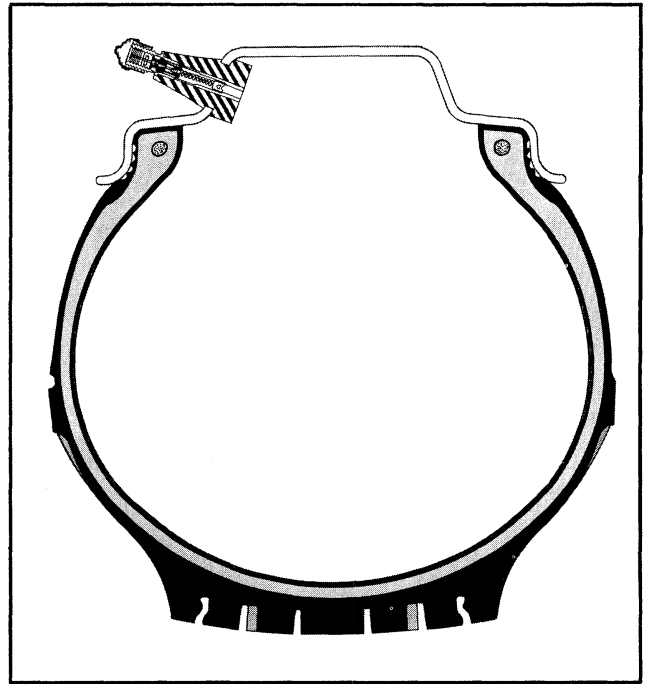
A-3 Cross Section of Typical Tubeless Tire
